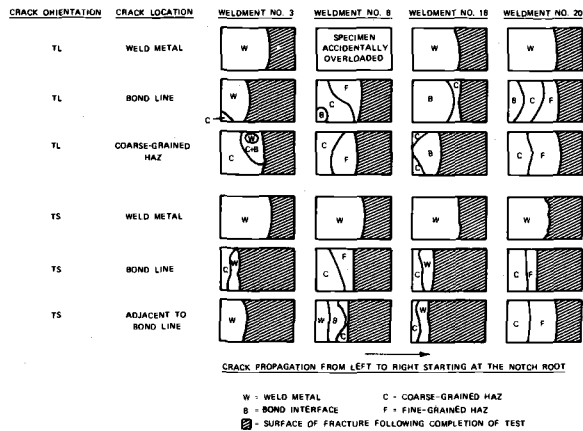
Demarcation of weld and HAZ regions transversely by the fatigue crack in 4-in.-thick (102-mm) weldments.
